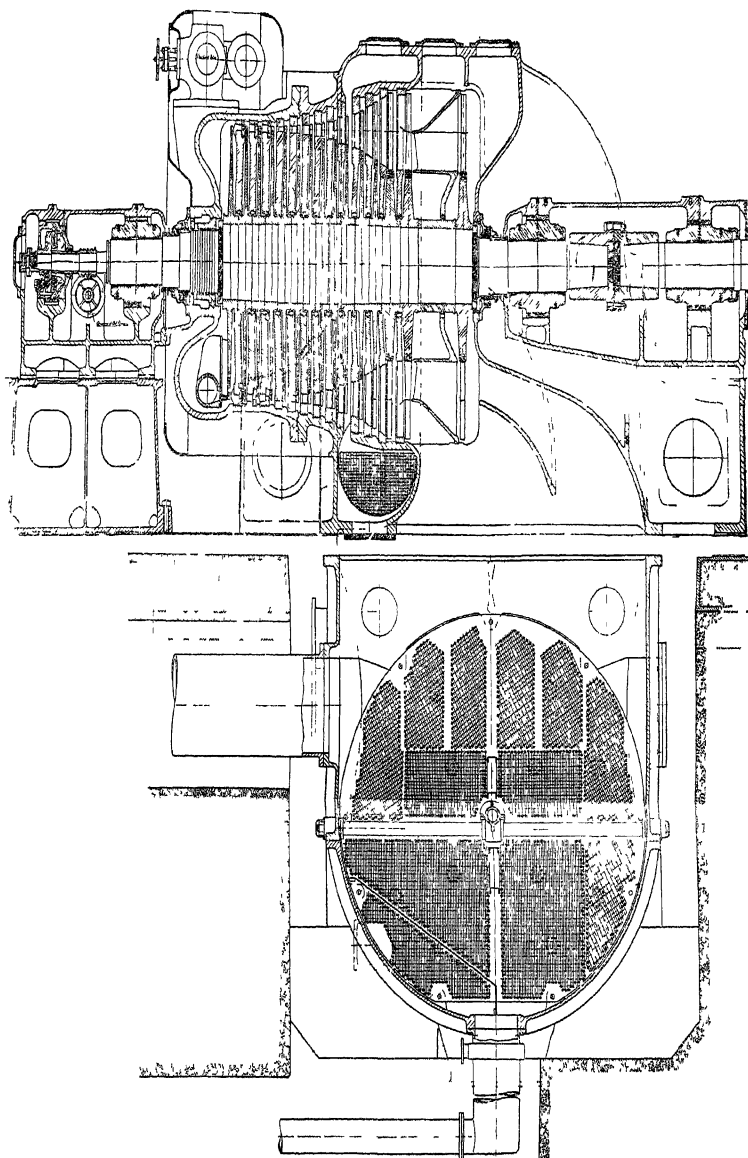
SECTIONAL DRAWING OF TURBINE AND CONDENSER
